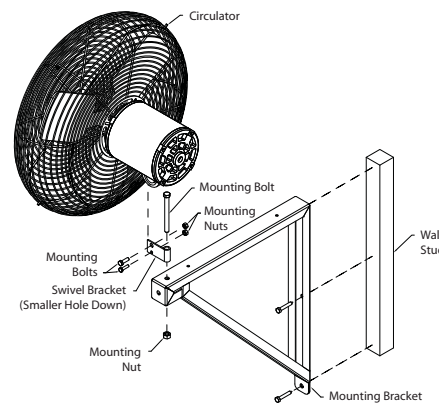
The bracket has two holes; be sure smaller hole is as specified.
